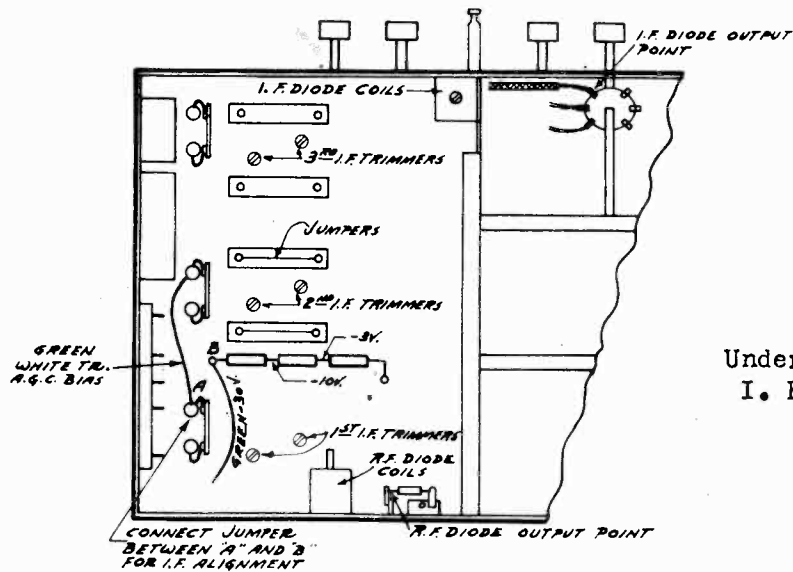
Under Chassis View Showing I. F. Adjustments, Etc.,
